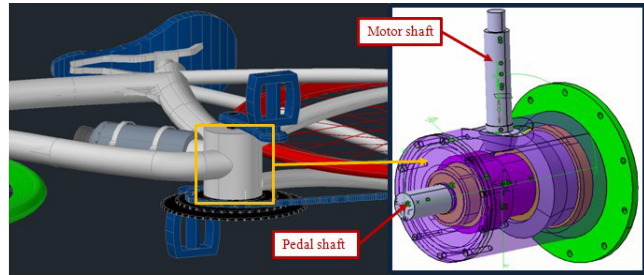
Mechanical transmission between the motor shaft and the pedal shaft
